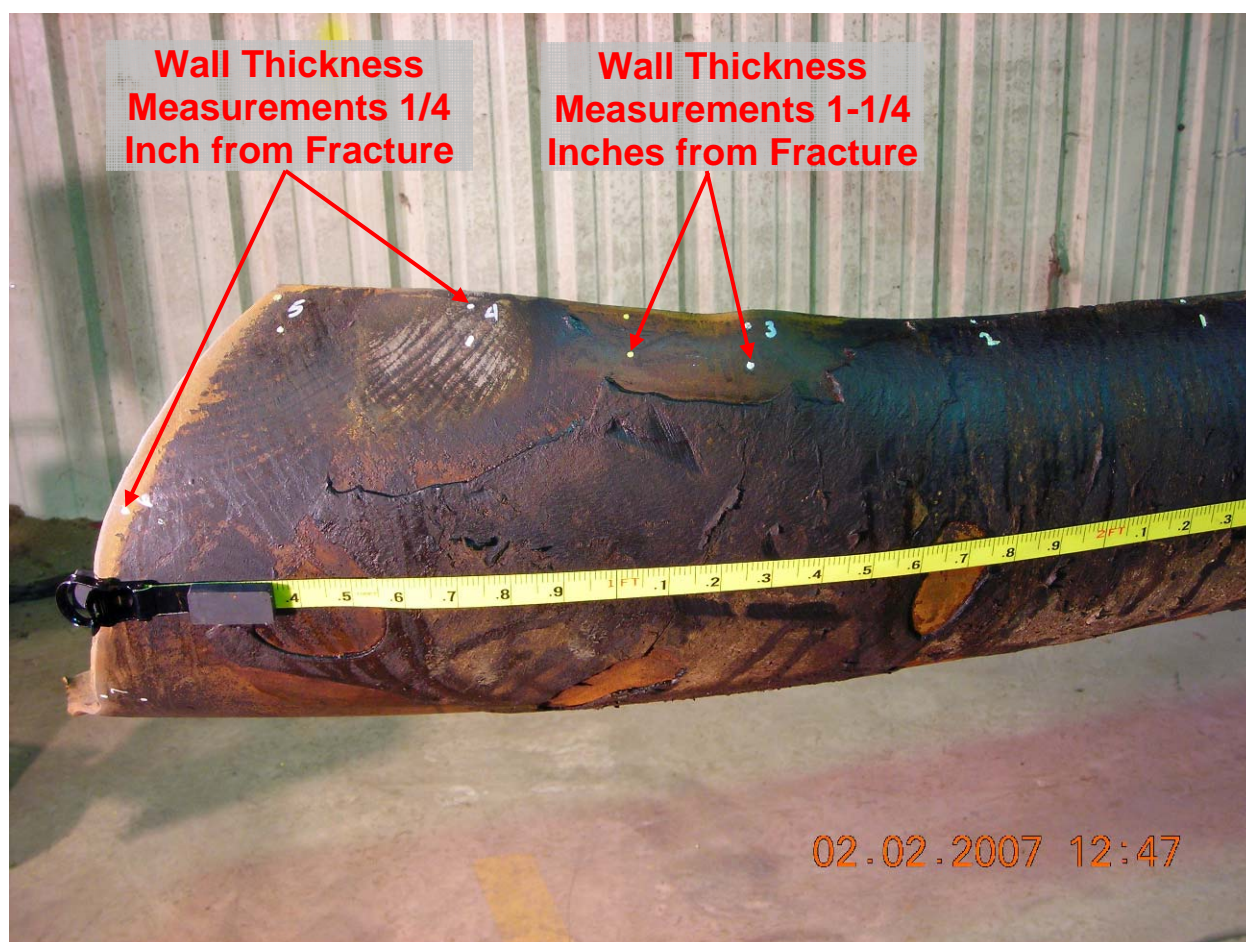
The left end of the transverse fracture shown in Figure 36. Notice that the outside edge of the fracture has been deformed and abraded, apparently by impact with a foreign object, following the fracture.
